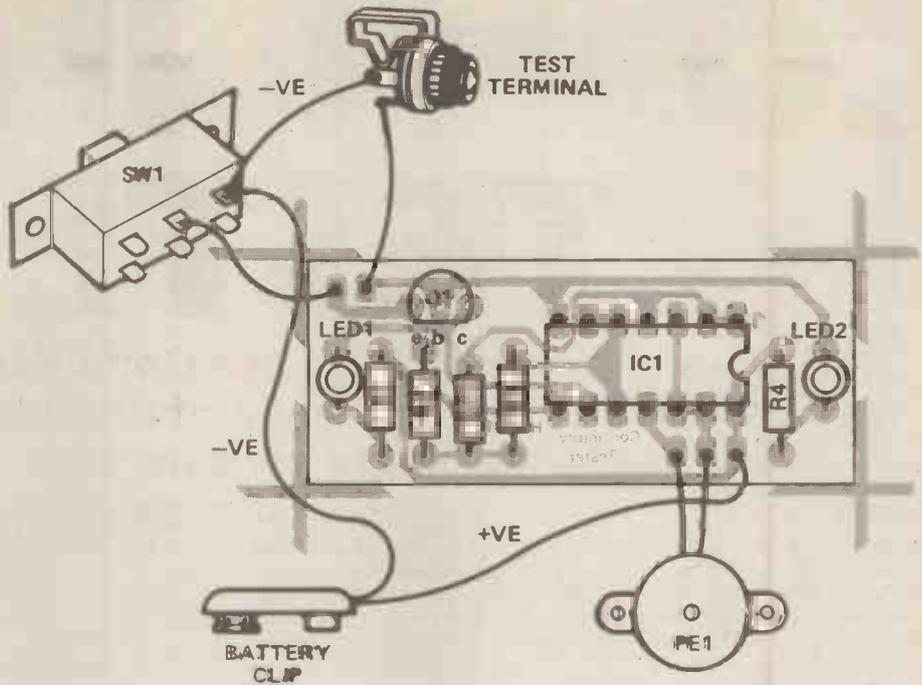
The component overlay. Don't solder in the LEDs until the PCB is installed in its box as described.
